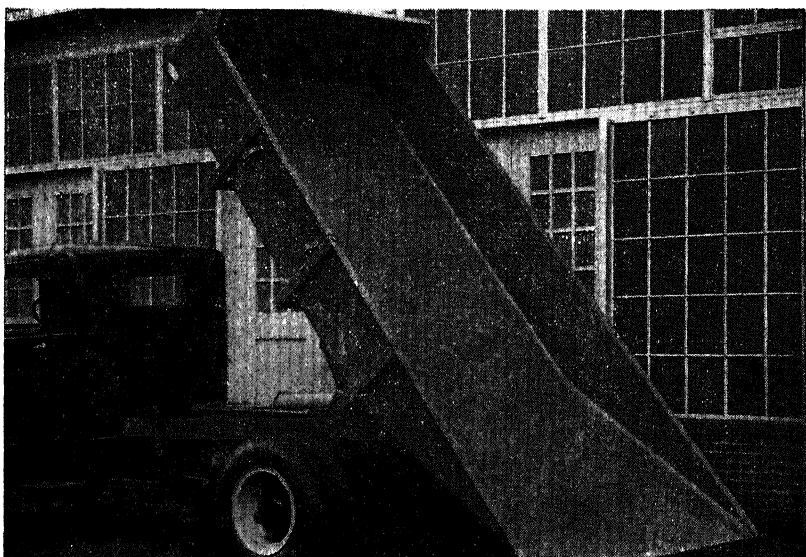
Arc welded dump truck body. Smooth surfaces facilitate complete unloading.
